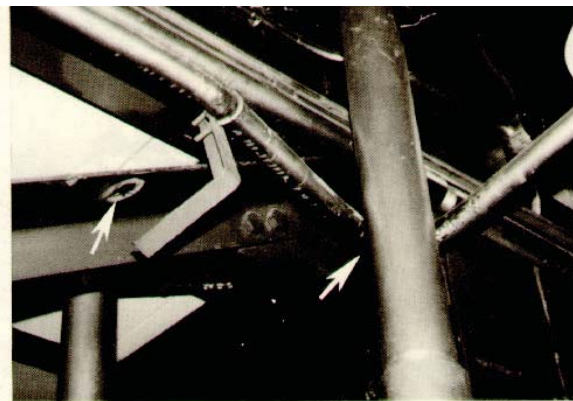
Failure of Welded Attachment to Backup Structure
